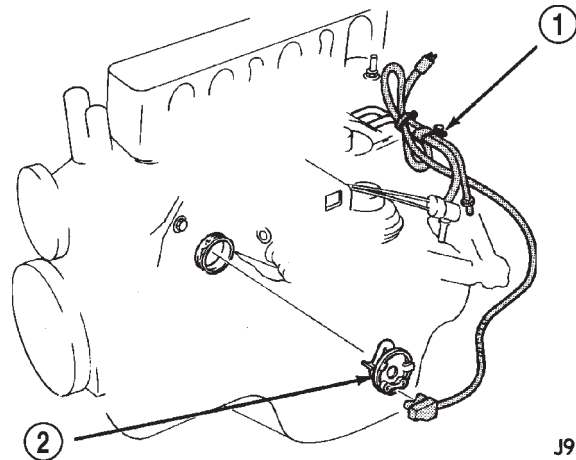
Heater and Cord—2.5L 4-Cylinder Engine
